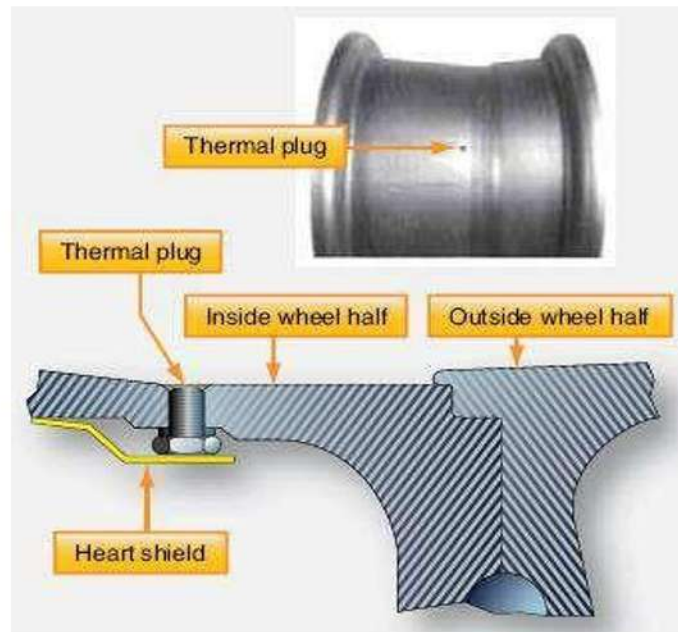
Heavy use of the aircraft brakes can cause tire air temperature and pressure to rise to a level resulting in explosion of the wheel assembly. To alleviate this, thermal plug(s) mounted in the inner wheel half of a high performance aircraft wheels are made with a fusible core that melts and releases the air from the tire before explosion.
